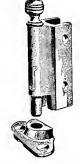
Head Board Fastener. Adams & Westlake Company.
